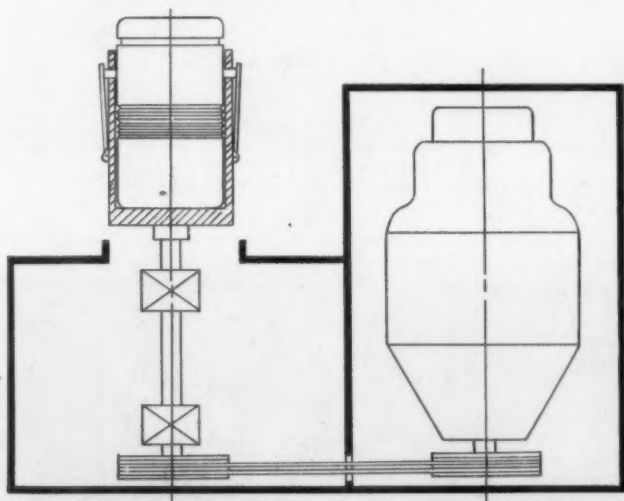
DETAILS OF VERTICAL SPINNER UNIT DESIGNED FOR CENTRIFUGAL CASTING OF AEROPLANE CYLINDER BARREL.
